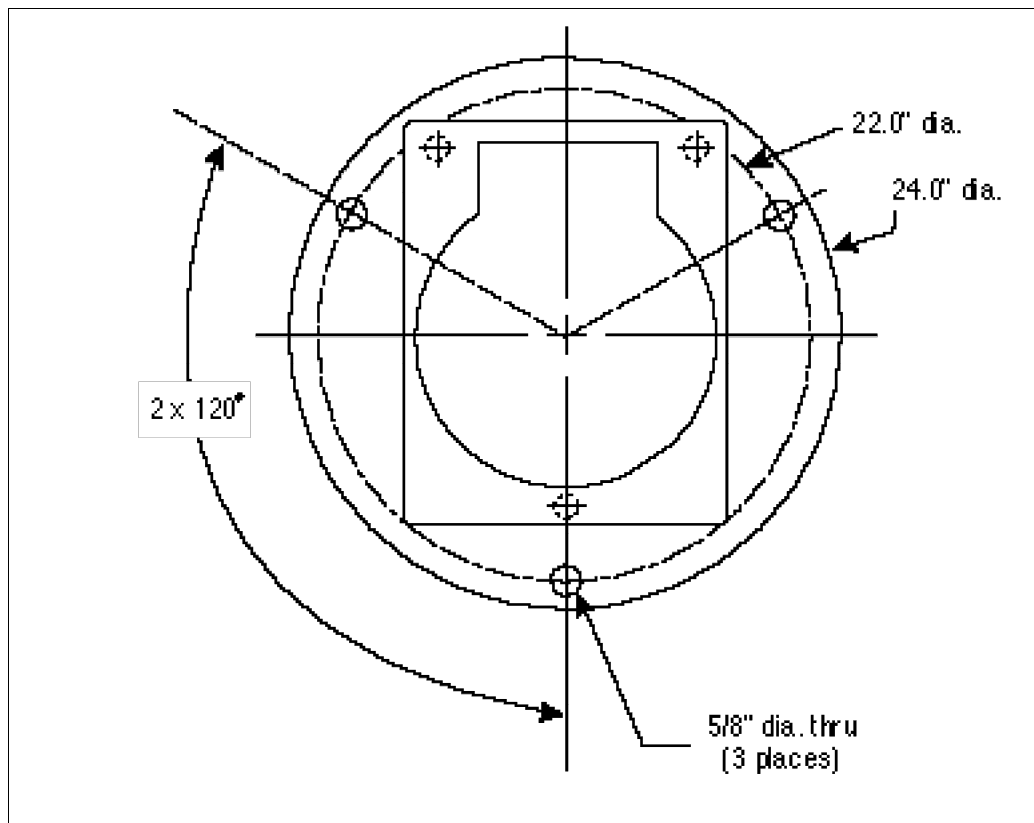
Mounting Hole Pattern (Plate/Spool-to-Floor)
